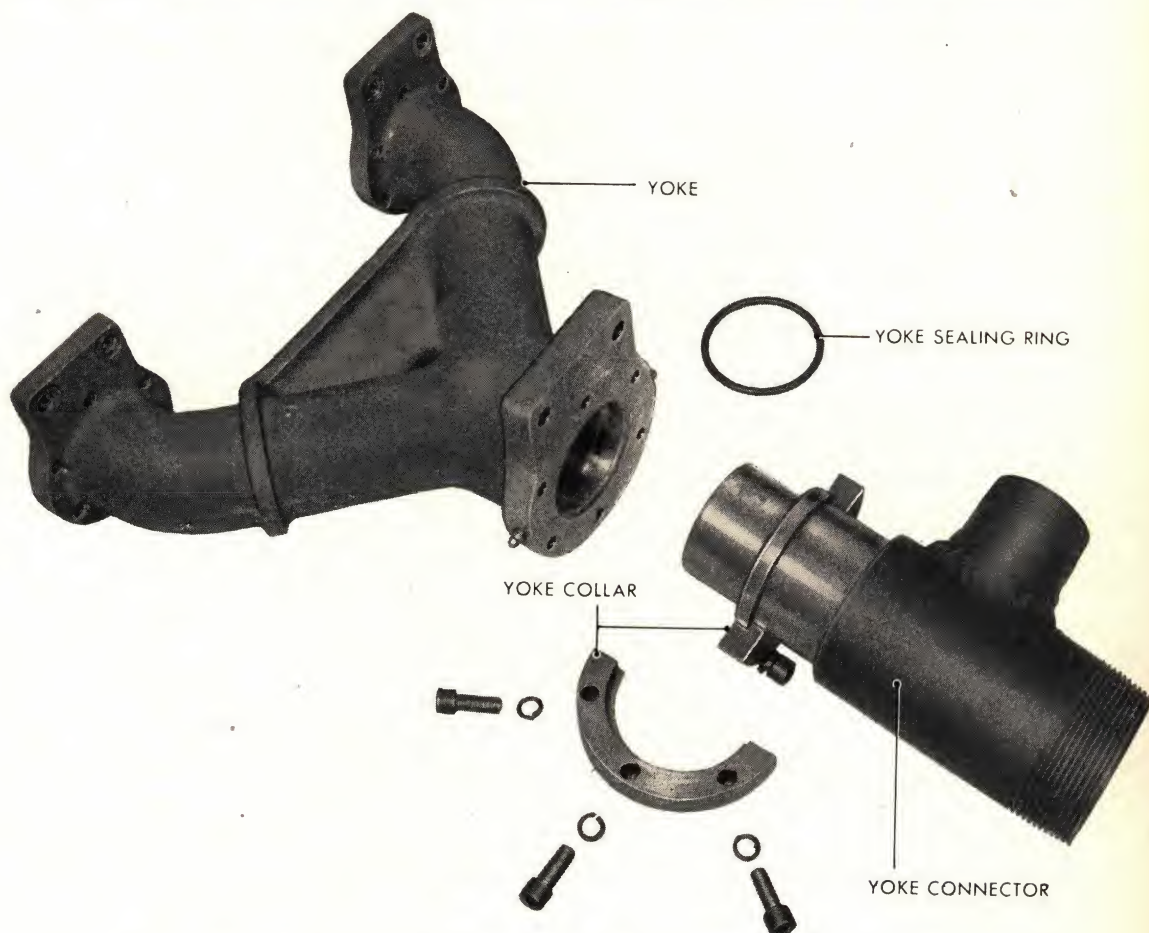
Flame Thrower Mk 1—Gun Yoke and Yoke Connector Disassembled
